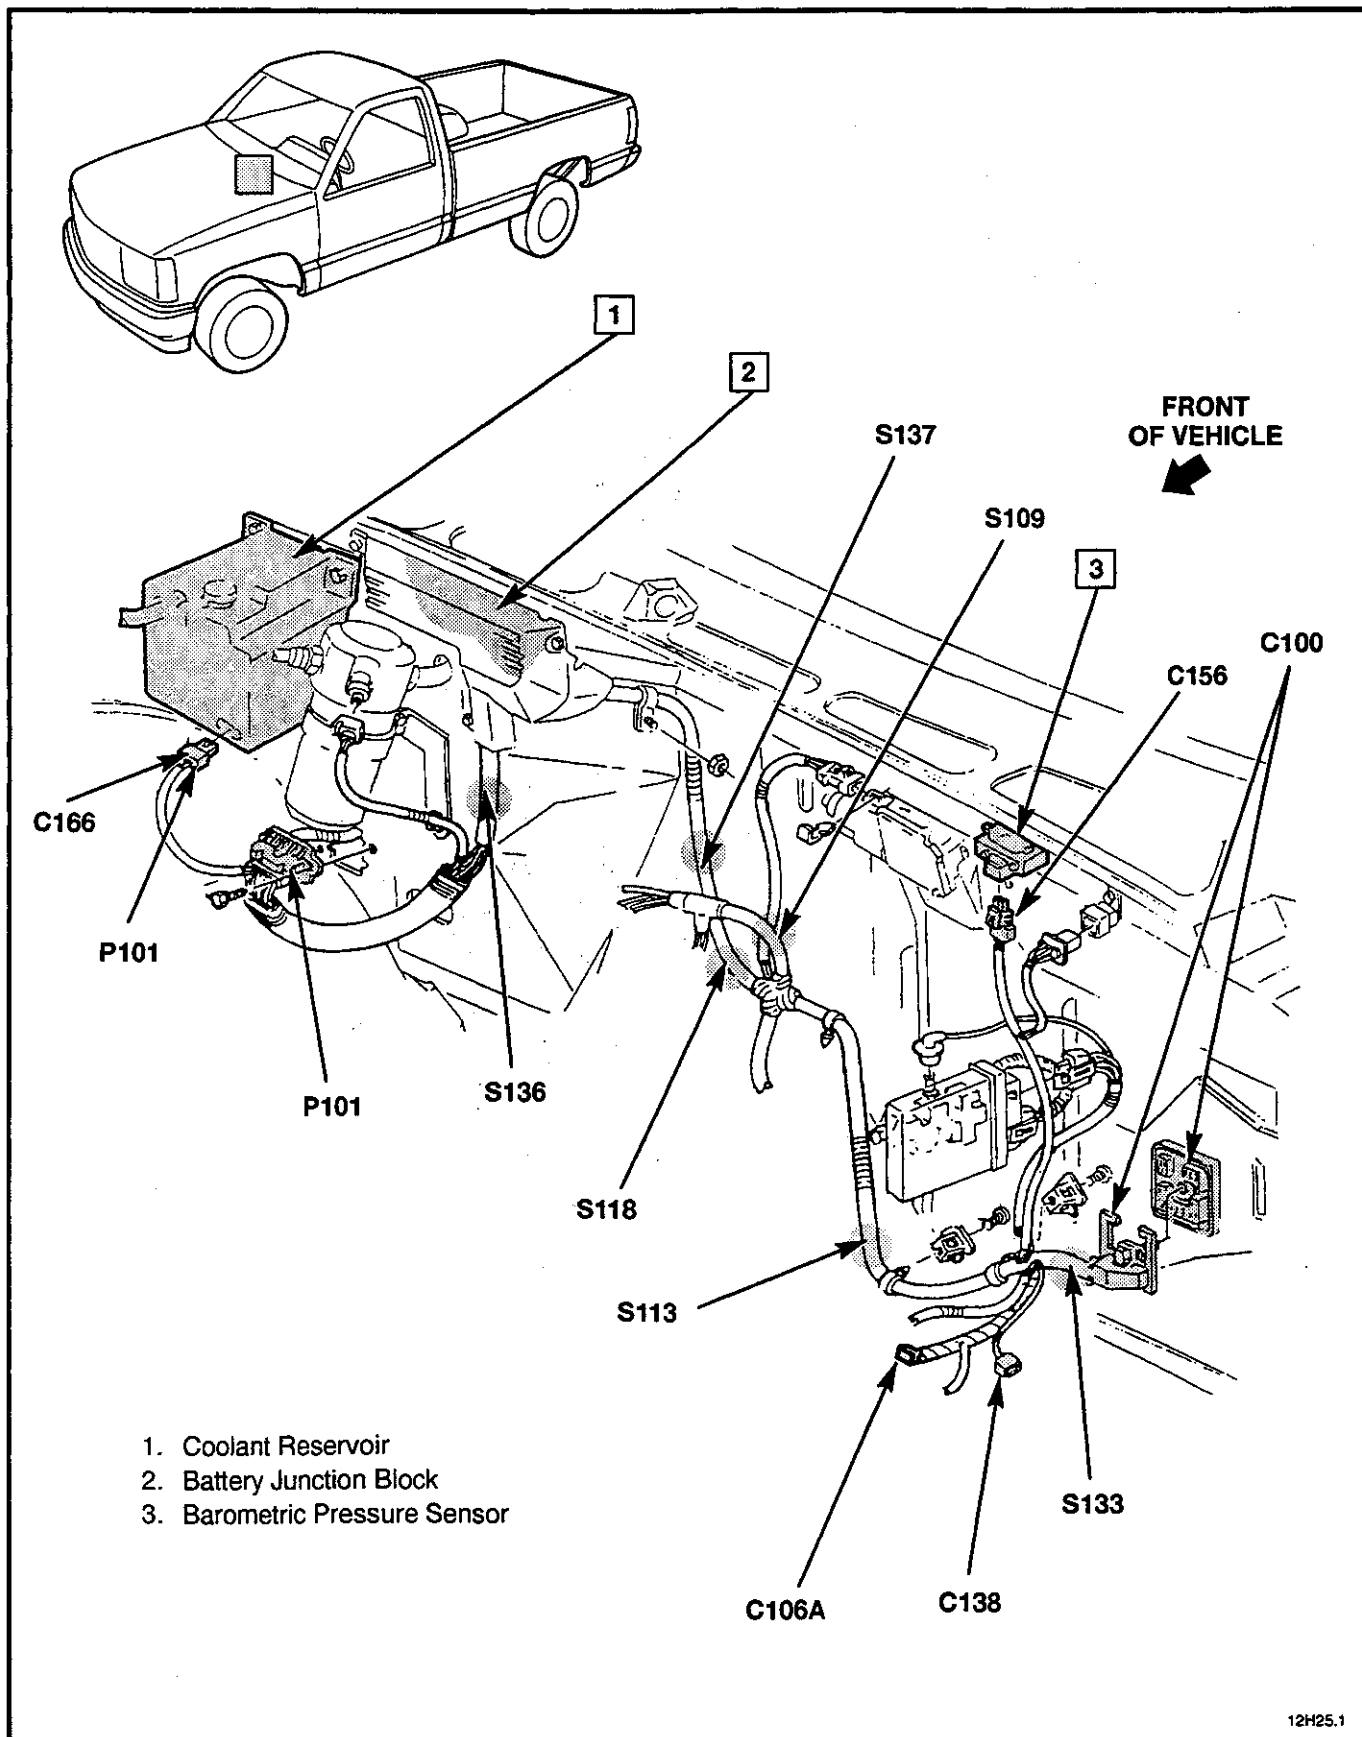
Cowl Wiring, (6.5L) Diesel Engine
